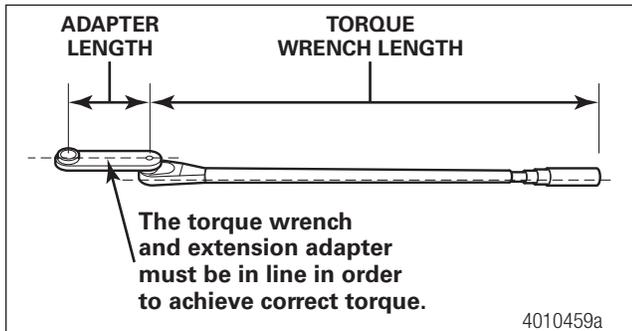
Adapter installed in-line with torque wrench requires adjustment of torque. Refer to the table below.
